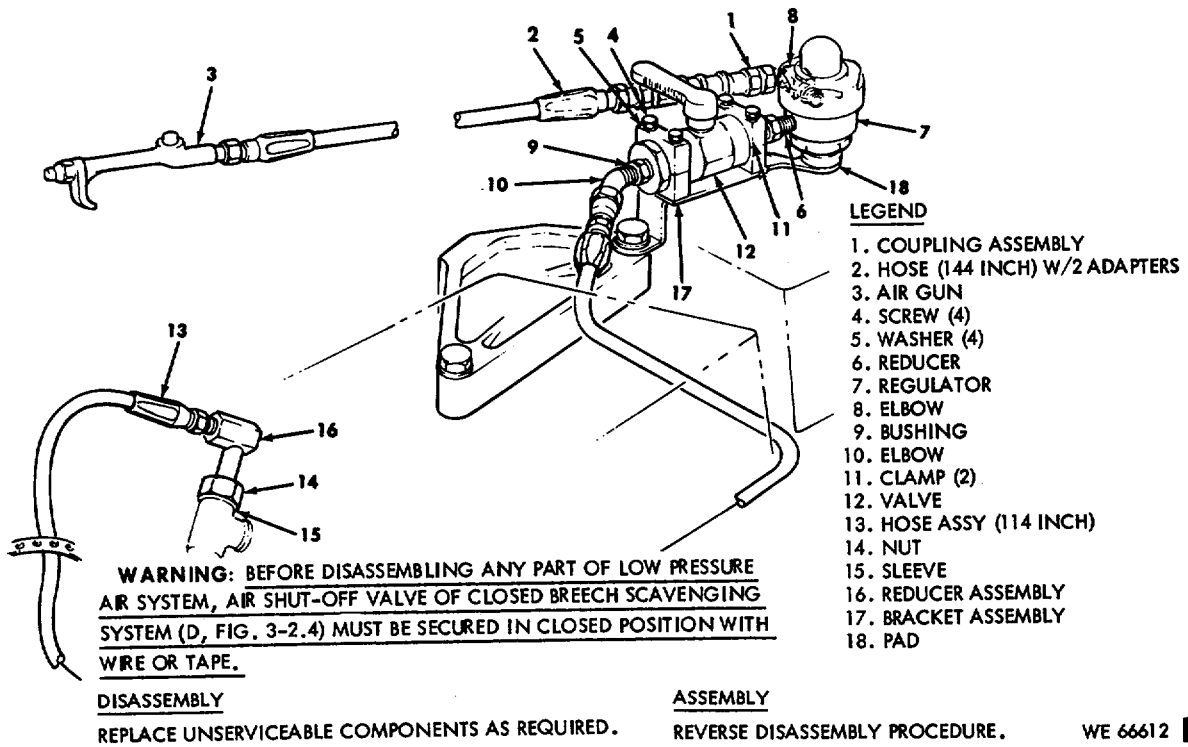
Disassembly/assembly - low pressure air radiator cleaning system.
